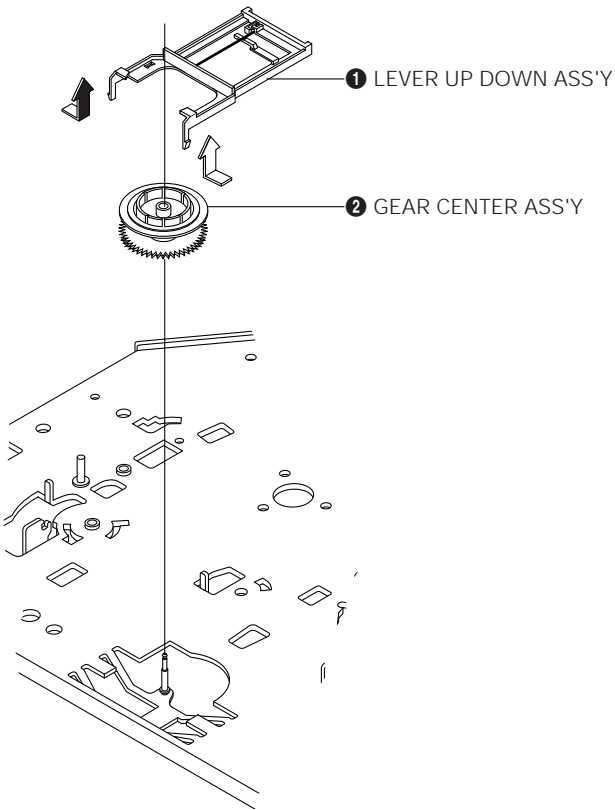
Lever Up Down Ass'y, Gear Center Ass'y Removal
